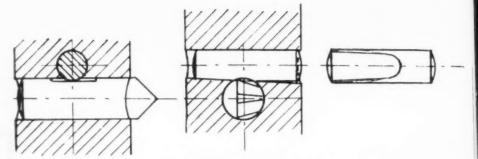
Clamping a cylindrical bar by means of a wedge-shaped component.
